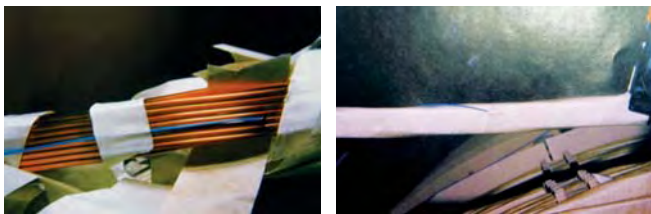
Fiber optic sensor directly in contact with CTC cable
